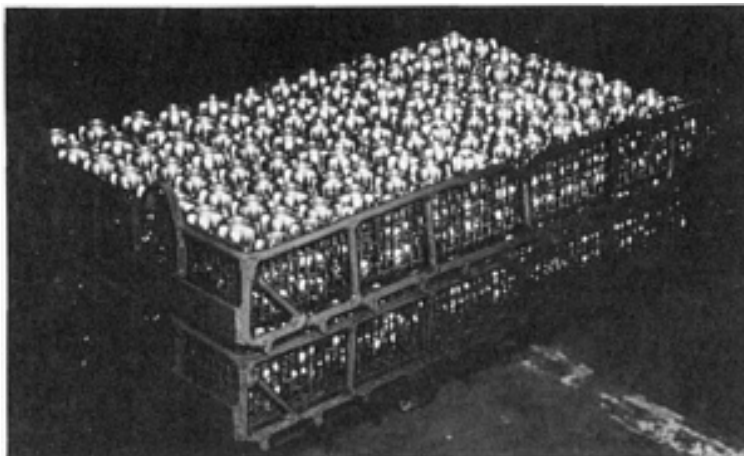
Racked array of universal-joint components ready for ion carburizing. Two stacked fixtures constitute one furnace load of 1500 parts. Courtesy of Dana Corporation
